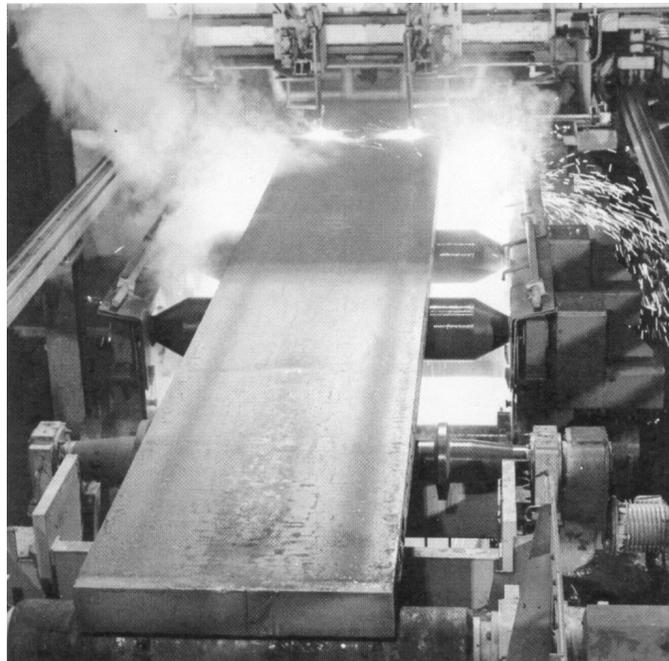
A slab of steel ejected from the casting machine is cut while moving out of the mould.
